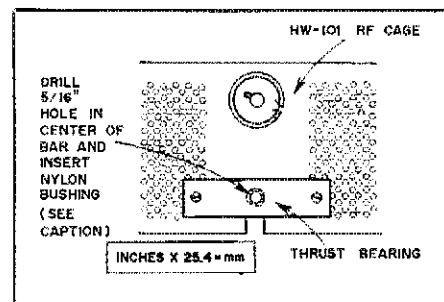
This thrust-bearing assembly reduces excessive wear on the loading-capacitor bearing in an HW-101. After placing the thrust-bearing assembly over the rotor shaft, mark mounting holes A and B to align with holes in the rear of the rf cage. Drill A and B with a 1/8-inch bit. Mount the assembly on the rf cage with no. 6 hardware.
